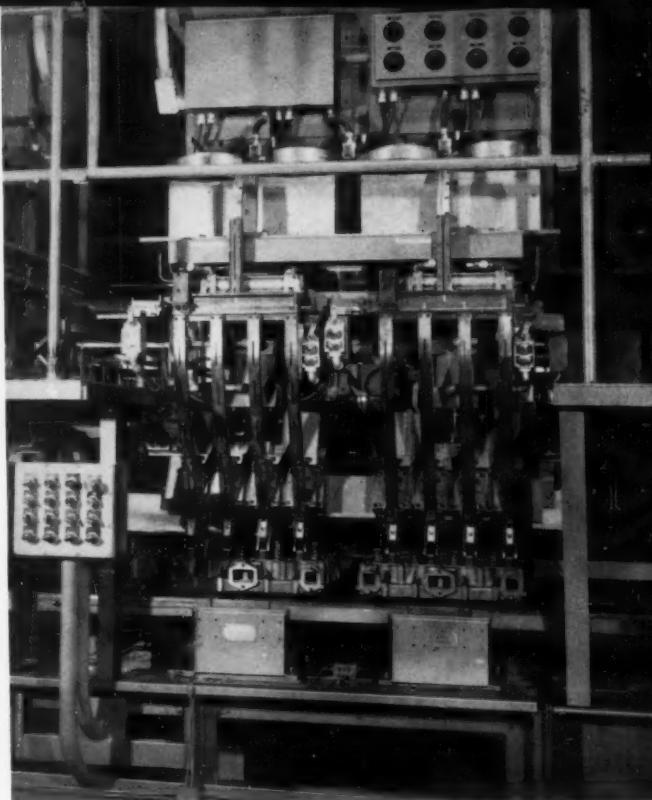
Setup used for the difficult operation of automatically assembling split keys (spring keepers) on valve stems. Springs are compressed prior to assembly of keys.
